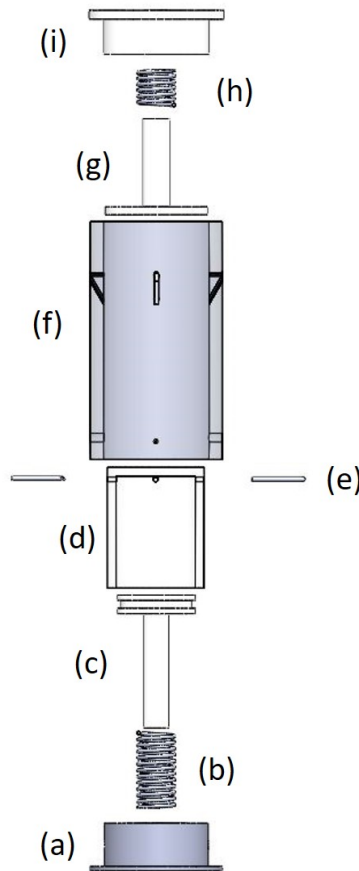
Exploded view diagram of the mechanism in real scale. The capsule has ten parts, each of which is labeled: (a) deployment cap, (b) deployment spring, (c) piston, (d) core, (e) needles, (f) case, (g) retraction pusher, (h) retraction spring, and (i) retraction cap. Note that the two retention pins and the sleeve are not shown here.
